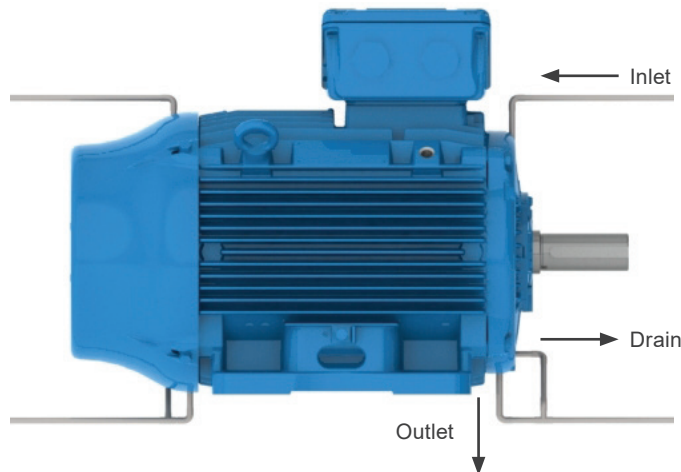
Oil supply and drain system of oil lubricated or oil mist lubricated motors
